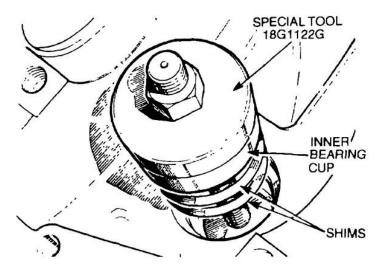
Installation of the Pinion Inner and Outer Bearing Cups
